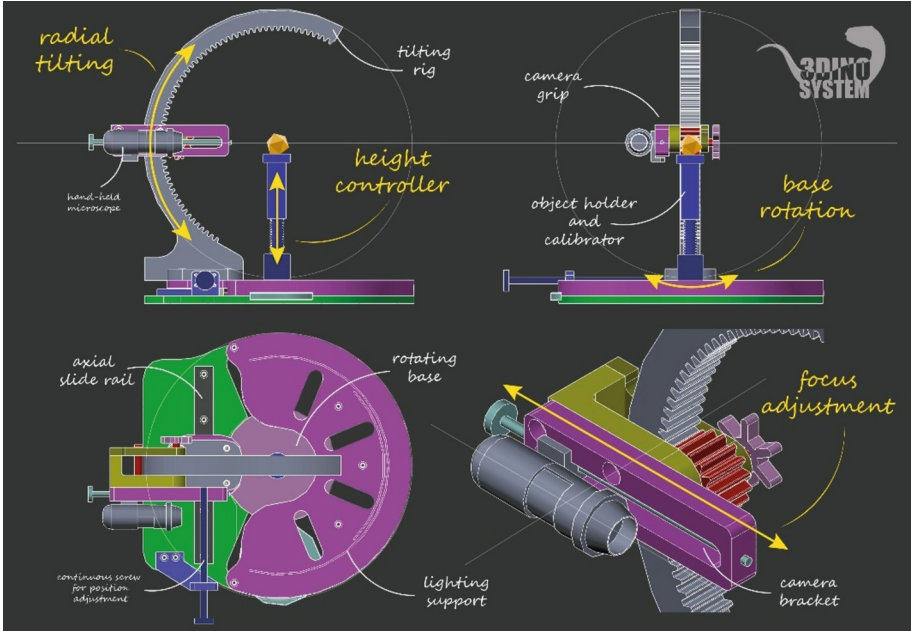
Diagrams of the first prototype of the 3DINO SYSTEM: side and top views, axonometric detail (bottom right) of the optics housing structure.
